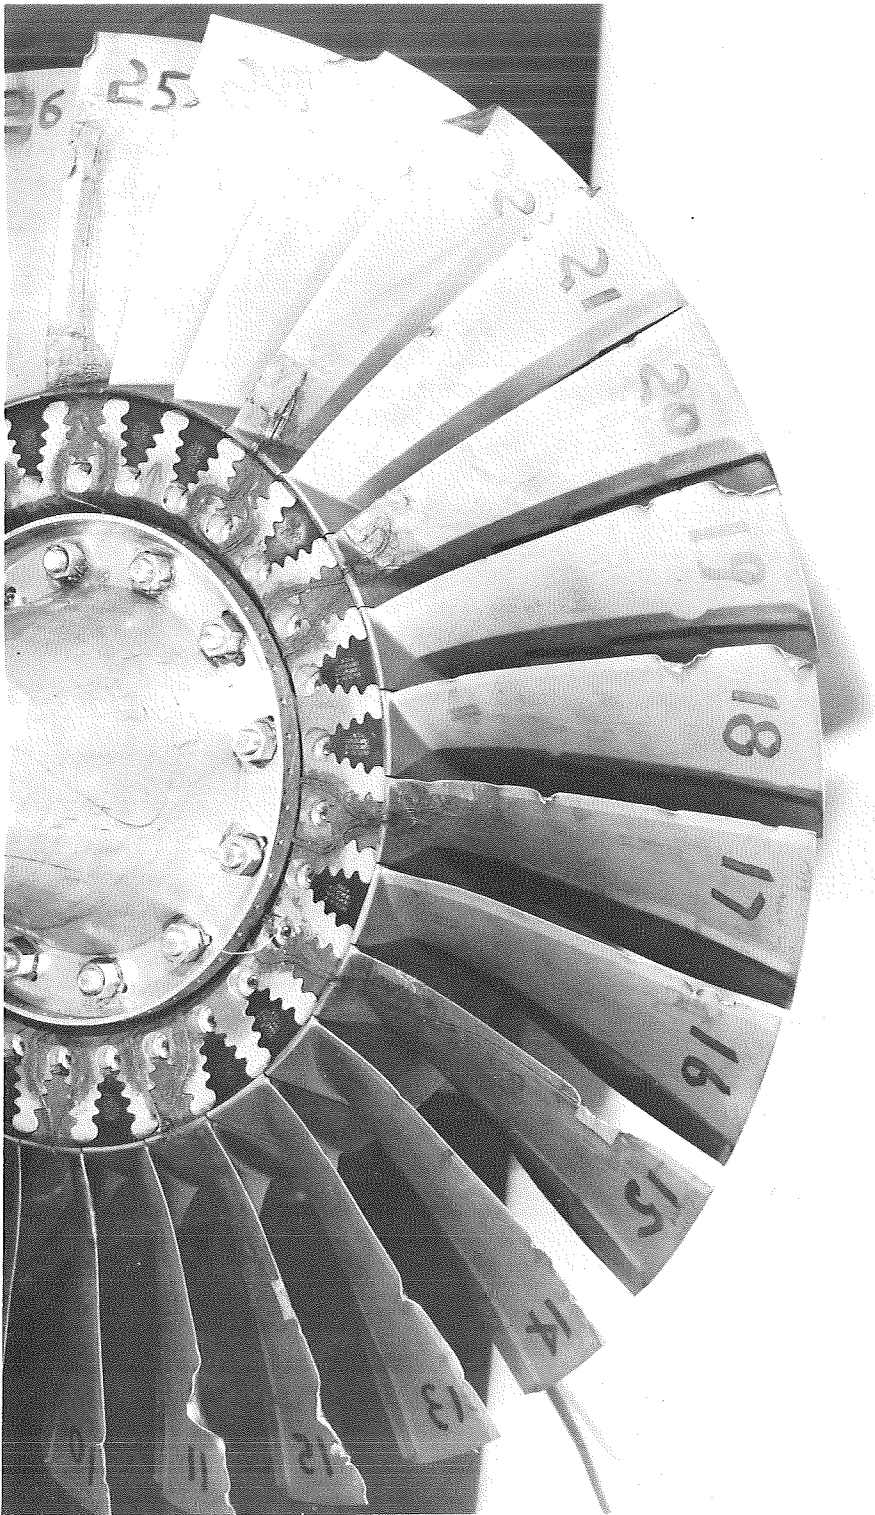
Damaged Tandem Rotor Assembly XPN-8611
